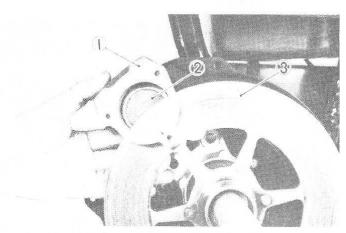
On YTM/YFM 200/225 models, the caliper inner section (1) and pad (2) can be detached as the disc/hub (3) is moved to the right (Sec 10)
